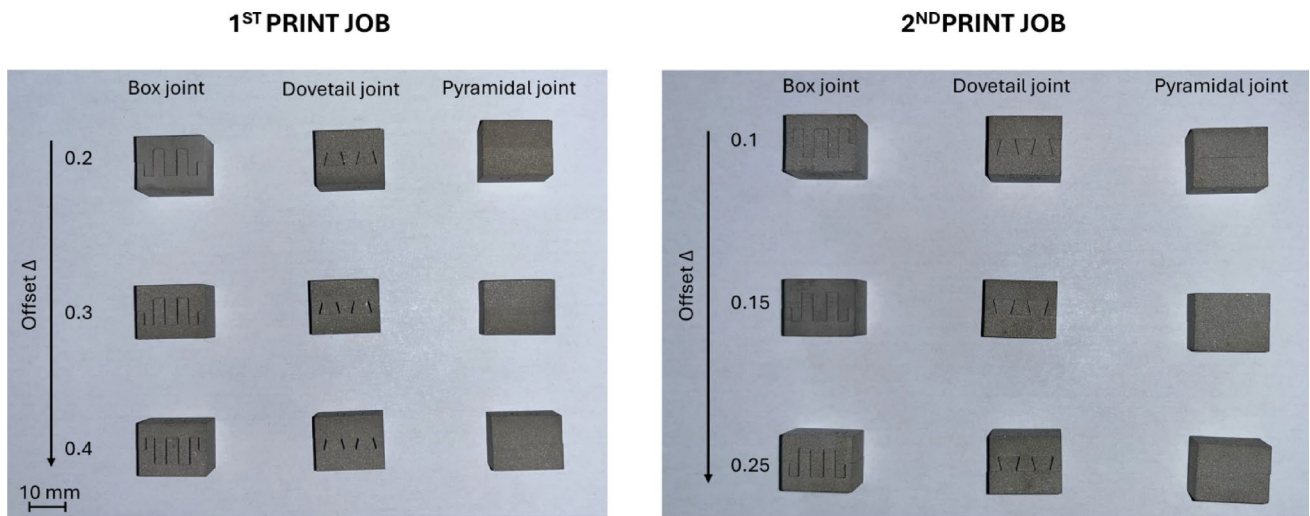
Sintered prismatic assemblies produced in the first and second printing jobs. For each job, box, dovetail, and pyramidal joints are shown at the investigated nominal interface offsets Δ . All specimens remained macroscopically intact and joined after co-sintering
